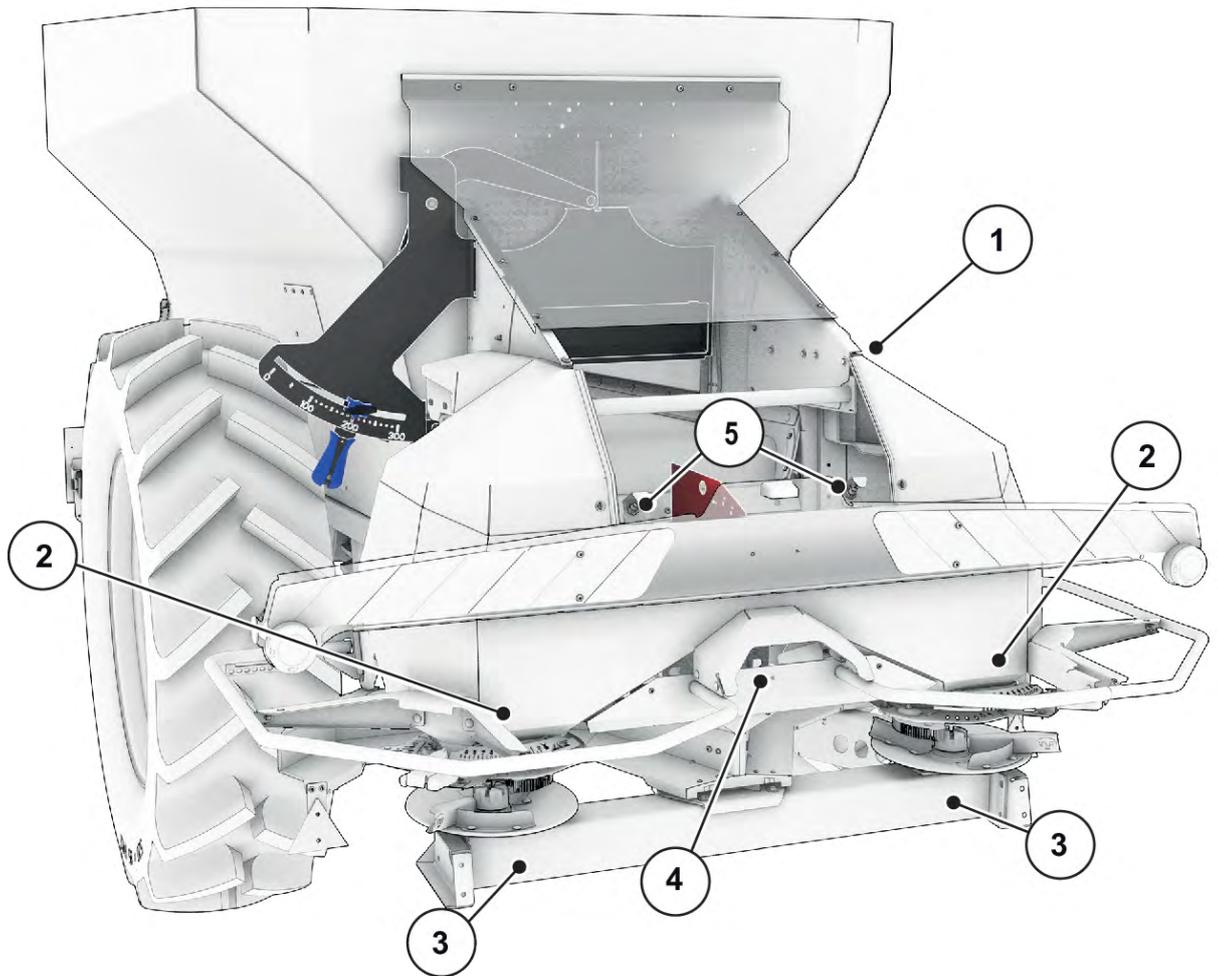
Overview of actuators and sensors at the AXENT large area spreader and fertilizer spreading unit
